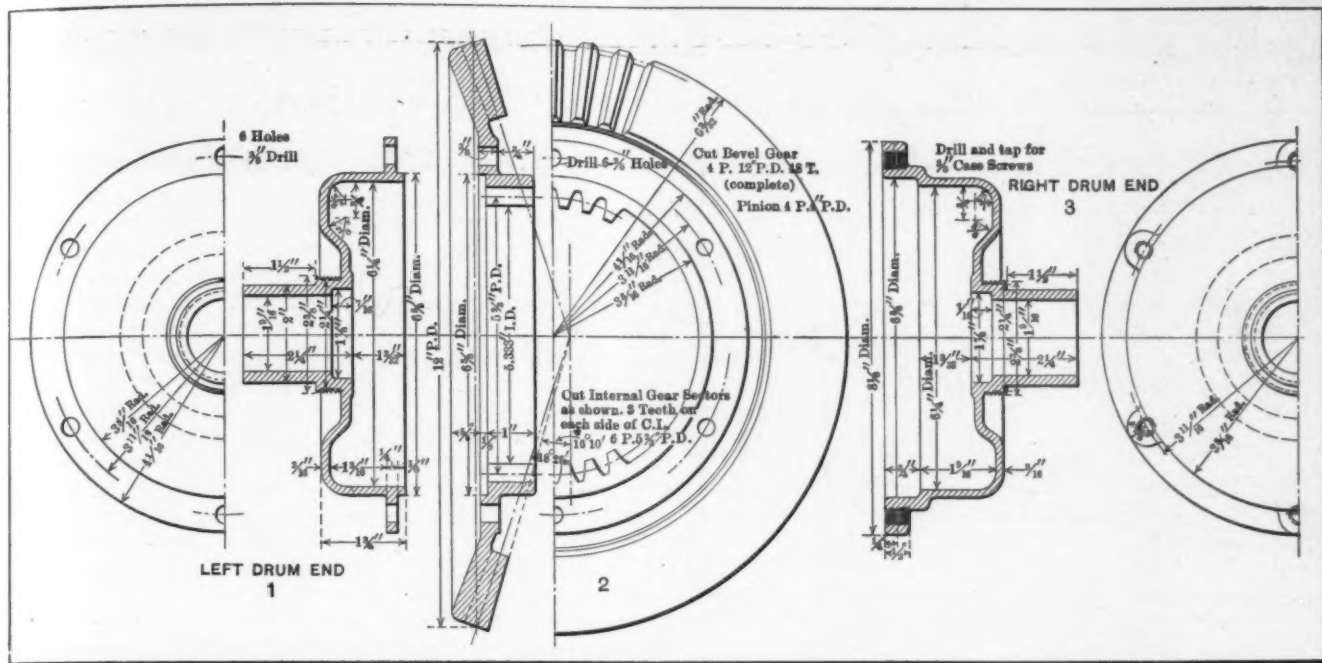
Left drum end; Fig. 2—Bevel gear; Fig. 3—Right drum end
